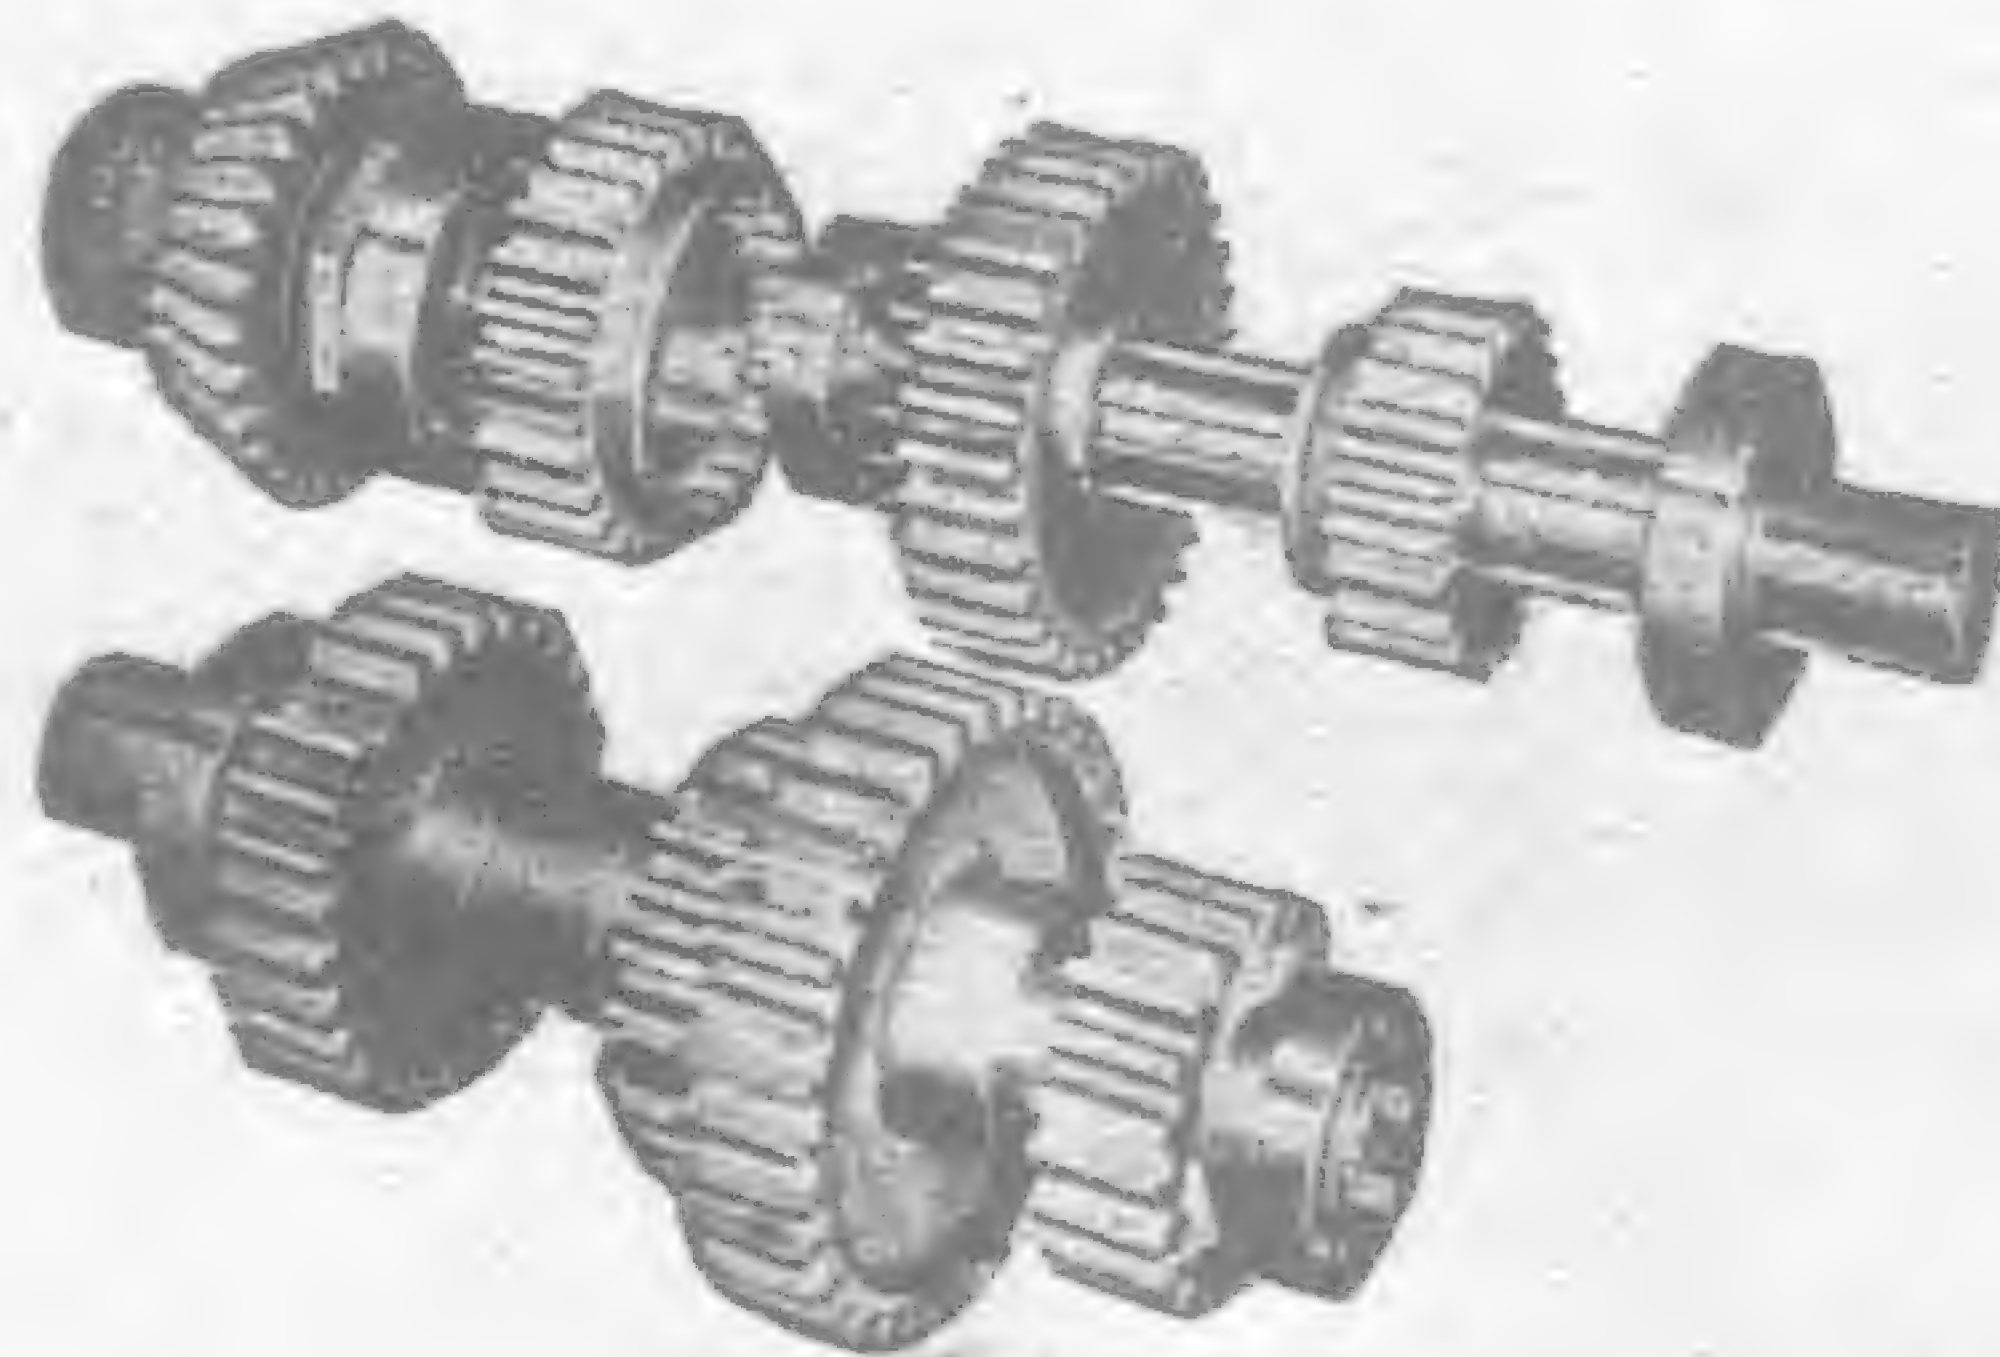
Transmission Gears and Shafts. All Gears are of Carburized Nickel Steel
